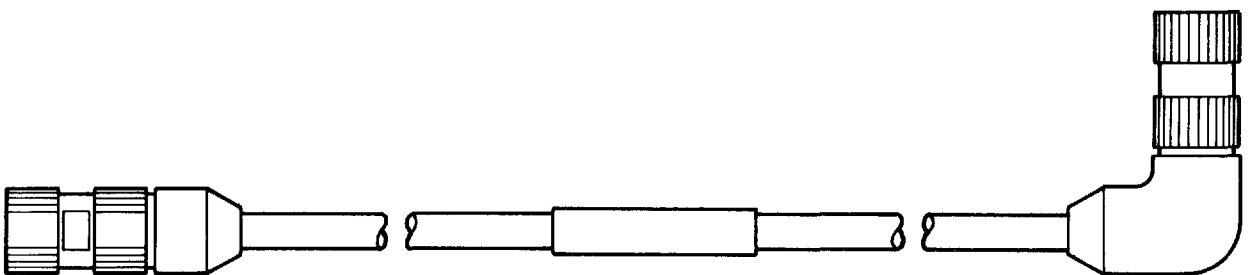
Adapter Cable Test Set (Sheet 1 of 4)
